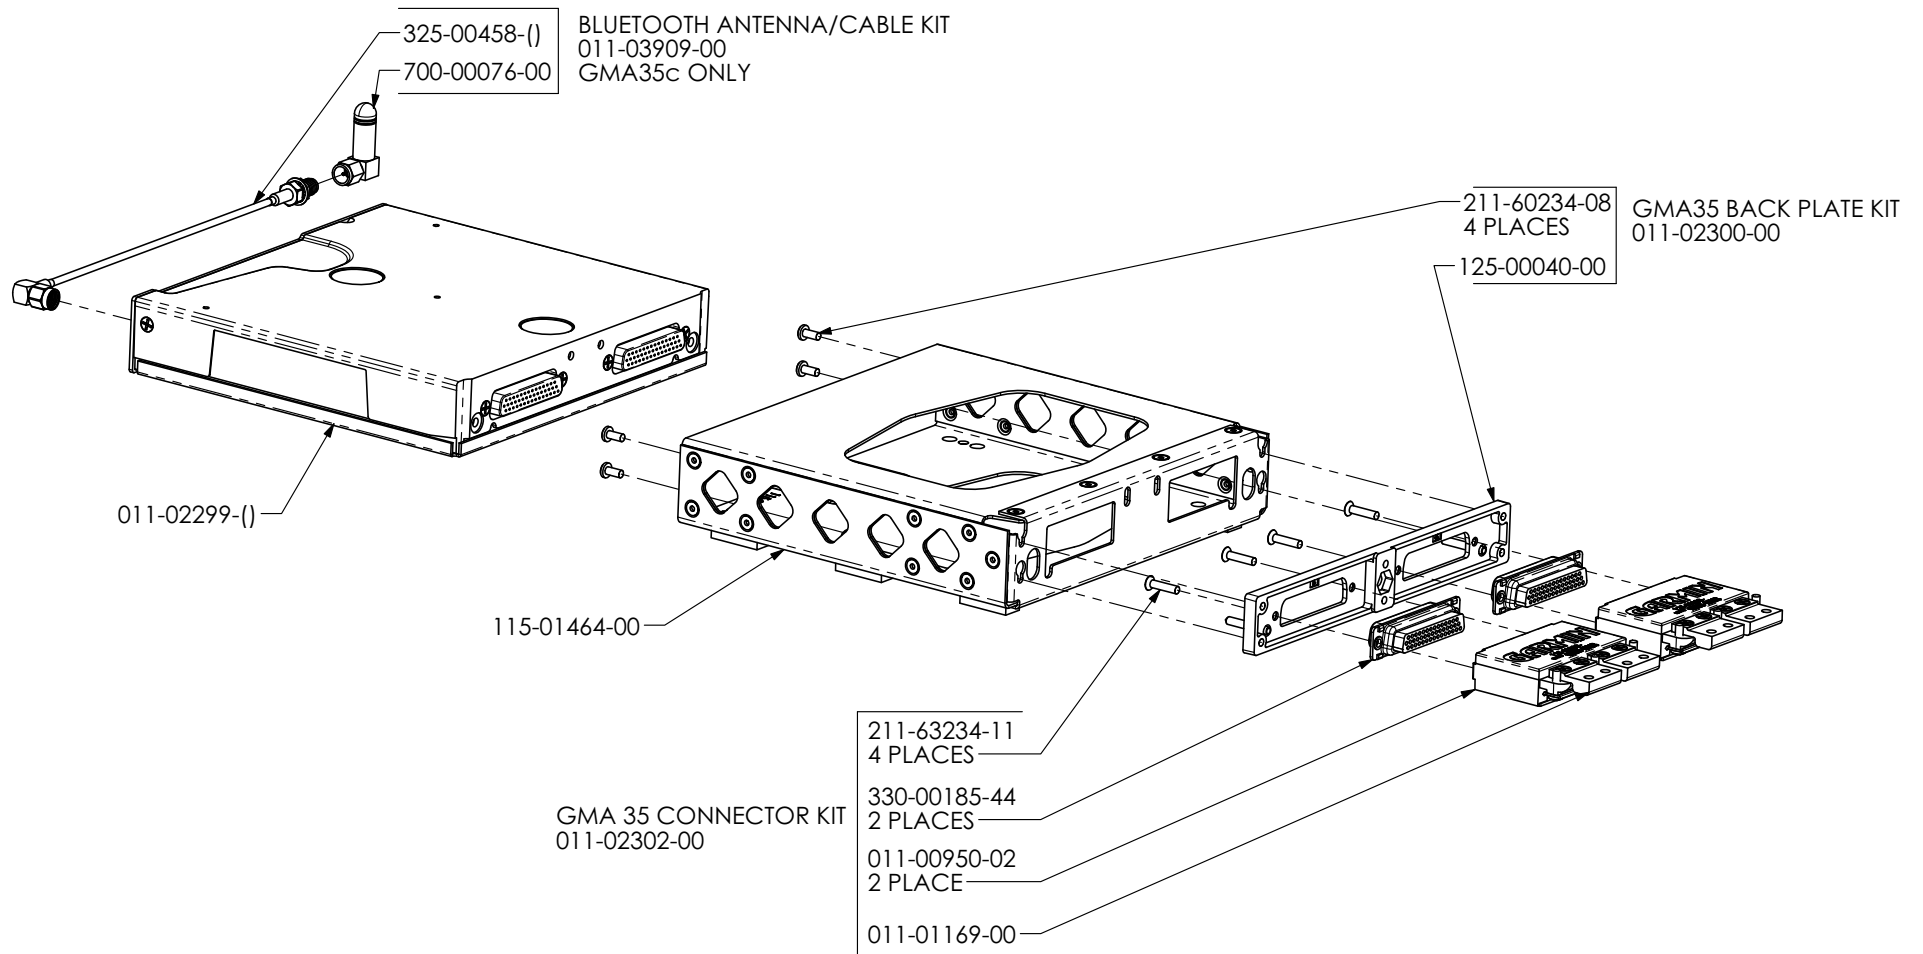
GMA 35c Mounting Rack Assembly Overview
